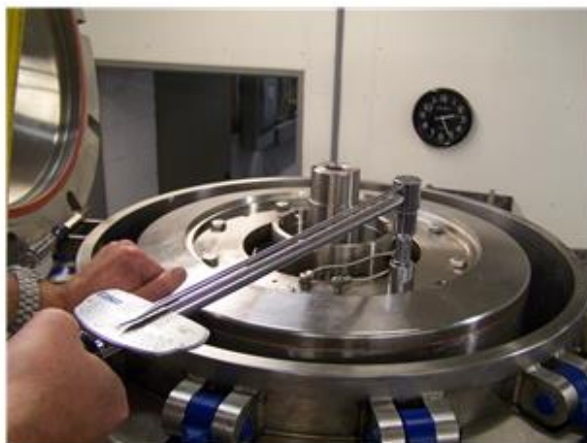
Attach the bucket assembly to the Contherm MAX
